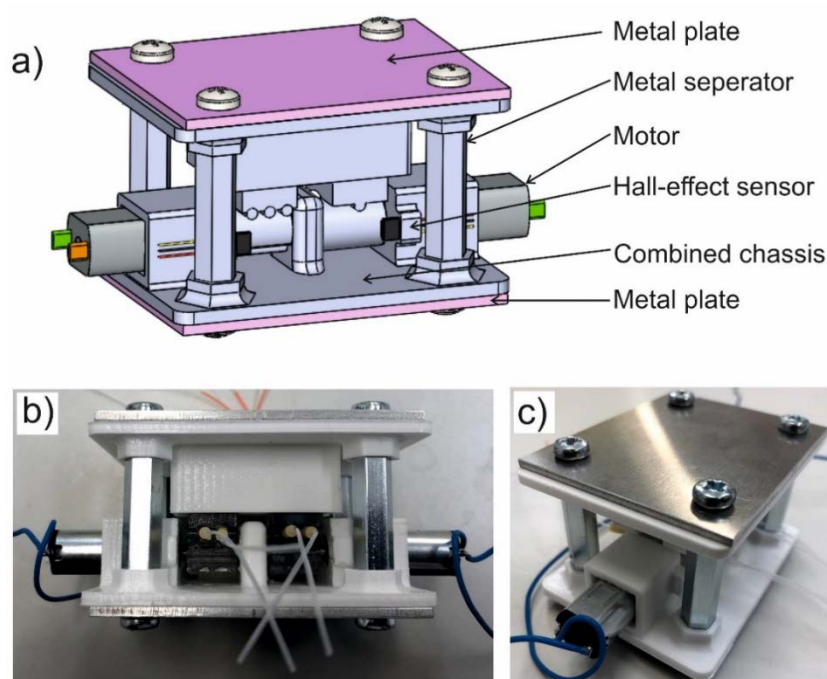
Two-pump system assembly for field deployable sensors. (a) Solidworks CAD file displaying the various components of the pumping system. (b) and (c) photographs of the actual assembled unit.
